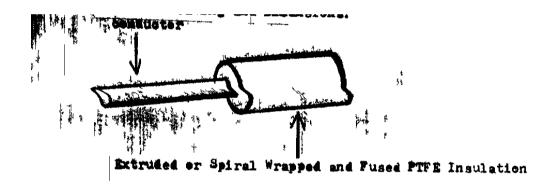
Outline Drawings for Pattern WH3P – 1A
